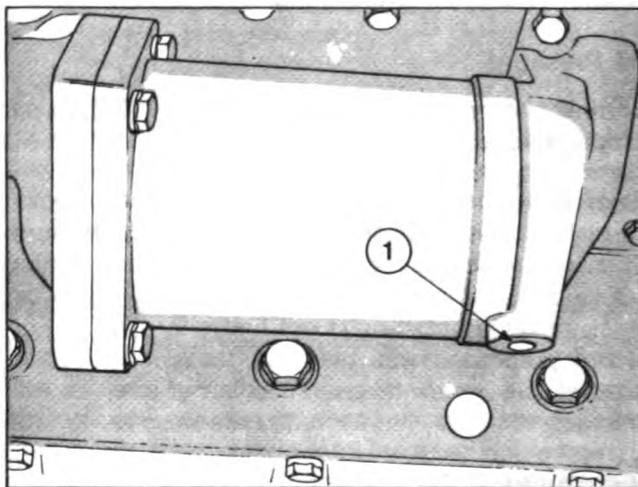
, (OM1012L). Cooling system drain points (oil cooler side) VT-903 C.I.D. Engine
